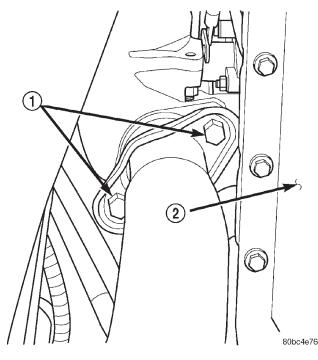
Exhaust System Inlet Pipe Retaining Bolts 1 – EXHAUST SYSTEM INLET PIPE RETAINING BOLTS 2 – ENGINE OIL PAN
